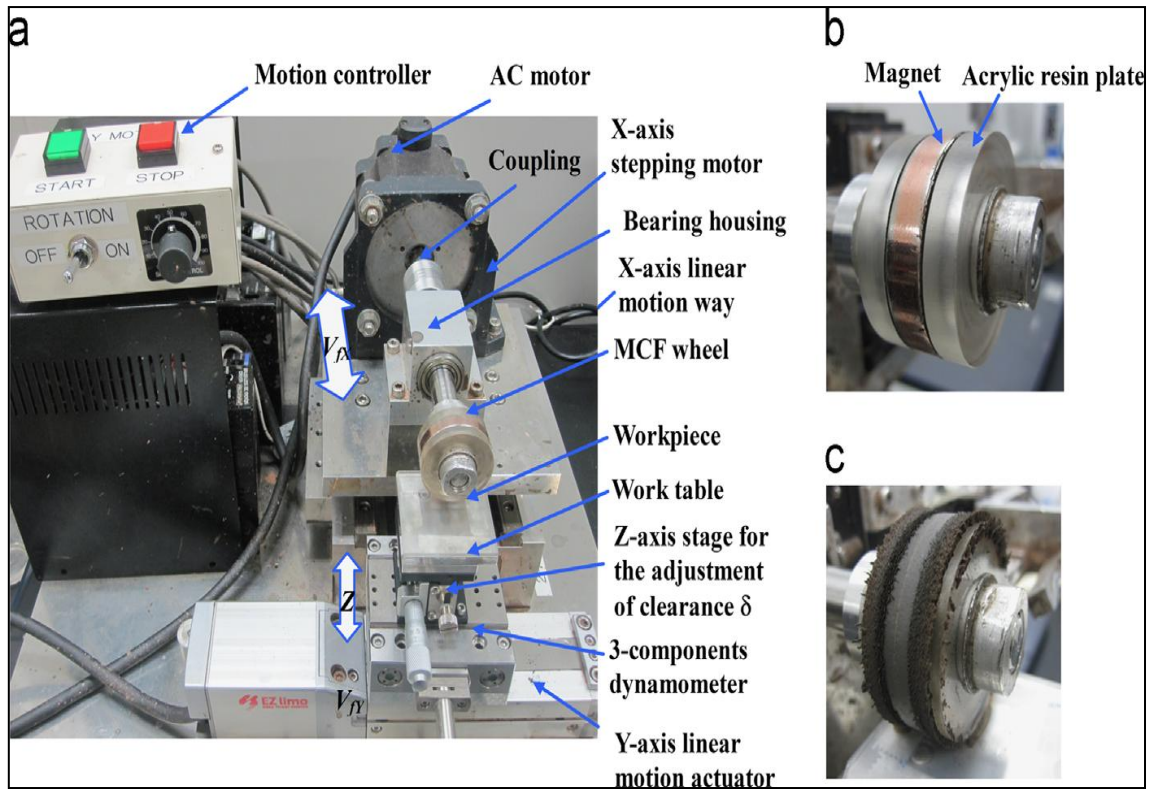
Experimental apparatus with the modified MCF wheel (a) components, (b) MCF wheel without slurry and (c) MCF wheel with slurry [Jiao *et al.*, 2013]
